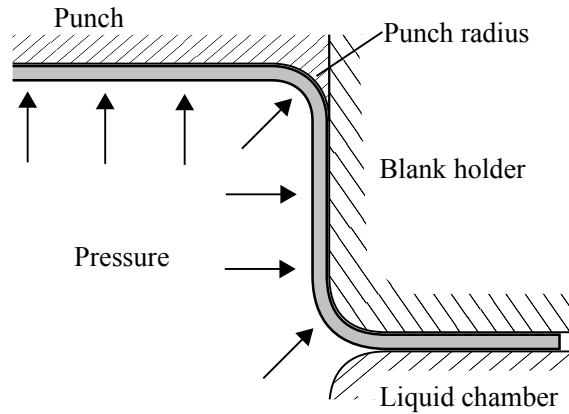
Illustration of the bulging-pressing compound forming setup used to manufacture the test piece.
